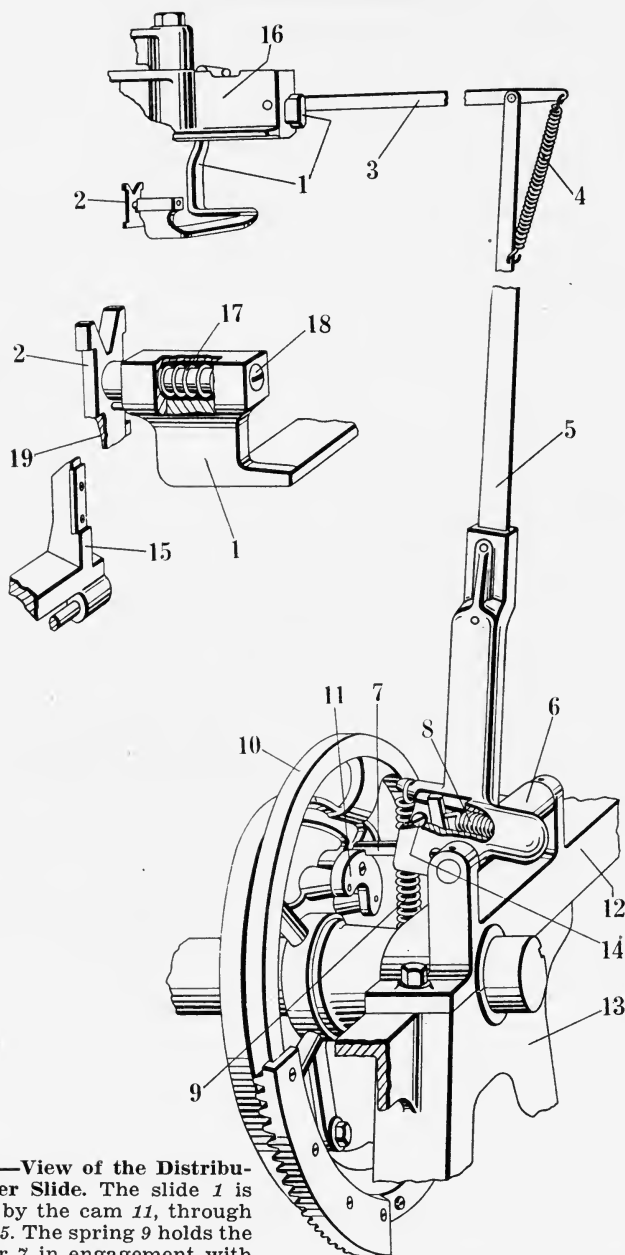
View of the Distributor Shifter Slide. The slide 1 is actuated by the cam 11, through the lever 5. The spring 9 holds the cam rider 7 in engagement with the distributor shifter cam 11 while the cam passes under it. The shifter mechanism pushes the matrix line from the second-elevator bar into the distributor box.
